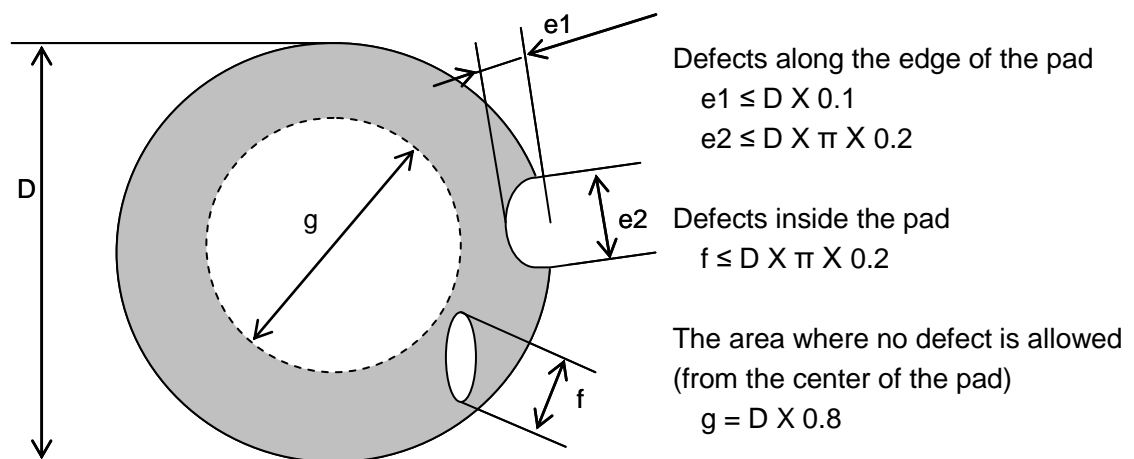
Acceptance Criteria for Defects on the Mount Pad such as BGA
